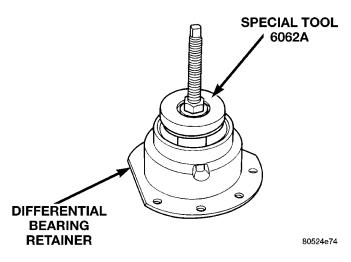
Position Bearing Cup Remover Tool in Retainer
